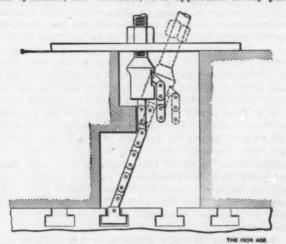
The Bolt Used to Hold Irregular Shaped Work to a Planer Bed.
